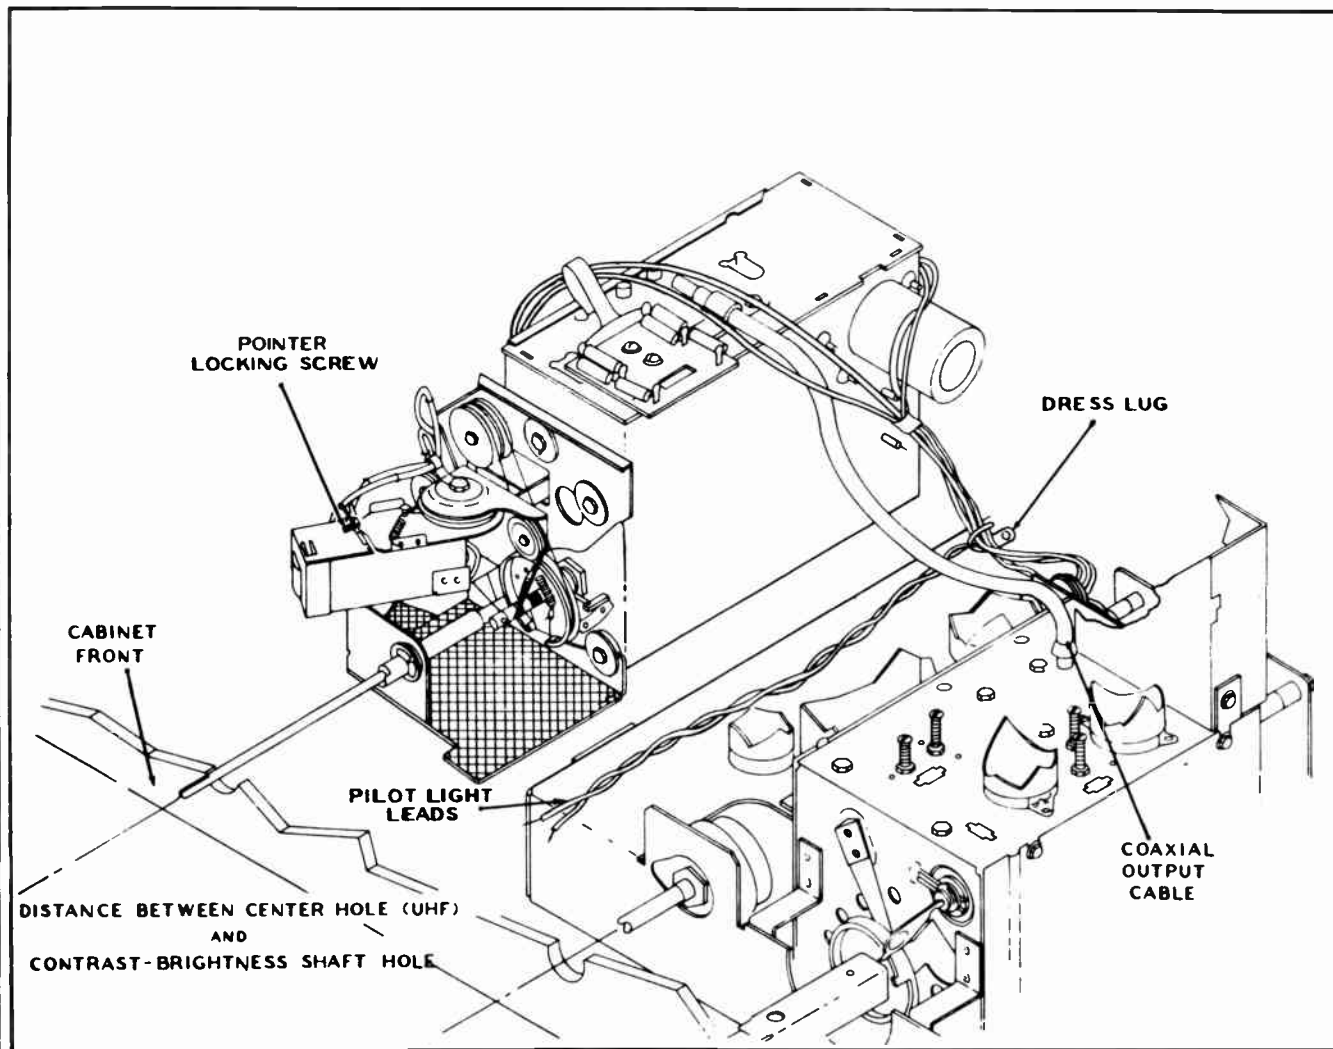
Lead Dress and Tuner Mounting Details (Tuner-Adapter Part No. 43-6591)
